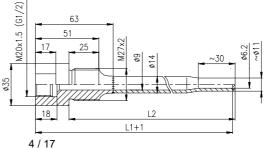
DIMENSIONAL DRAWING, TABLE OF DESIGNS AND WEIGHTS OF THERMOWELLS 11x0
